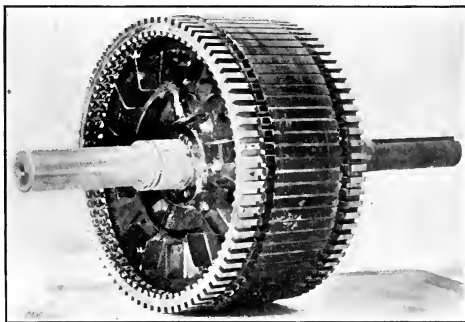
Squirrel-cage Rotor of Westinghouse Motor.
